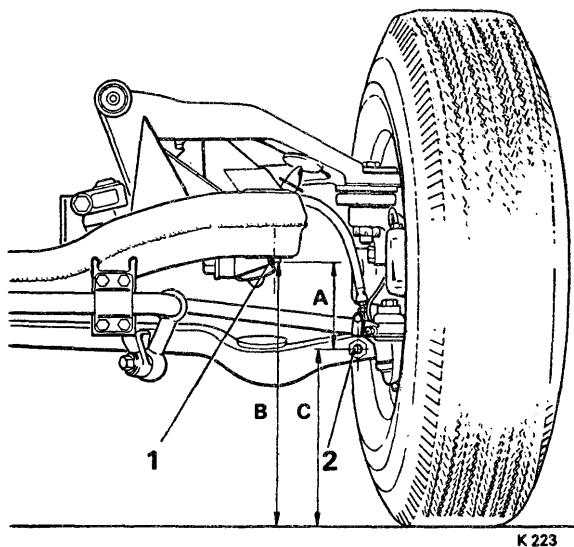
CAR HEIGHT CHECKING POINTS—FRONT
